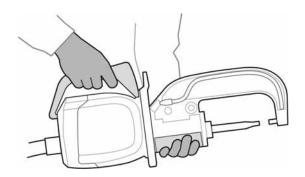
Holding the C-Tong correctly during welding.
